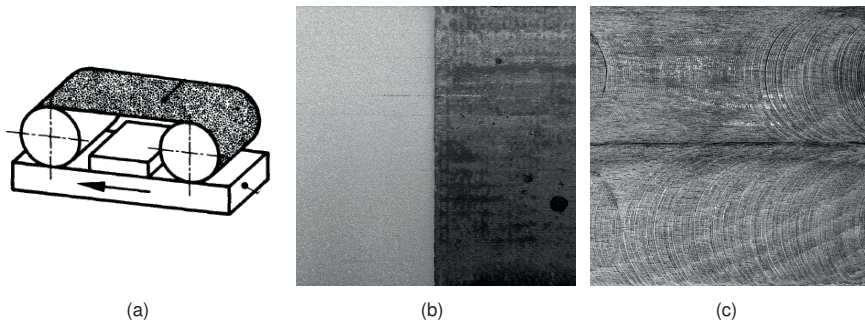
Parting: (a) belt grinding [109]; (b) sandblasted (left side) steel plate; (c) brushed surface.
